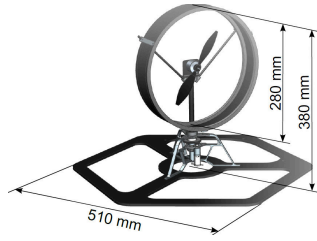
A safety ring shields the propeller. It is strung with threads to prevent fingers touching the blade. The lower part of the model shows the turning motor safely placed within the weight optimized aluminium frame.
